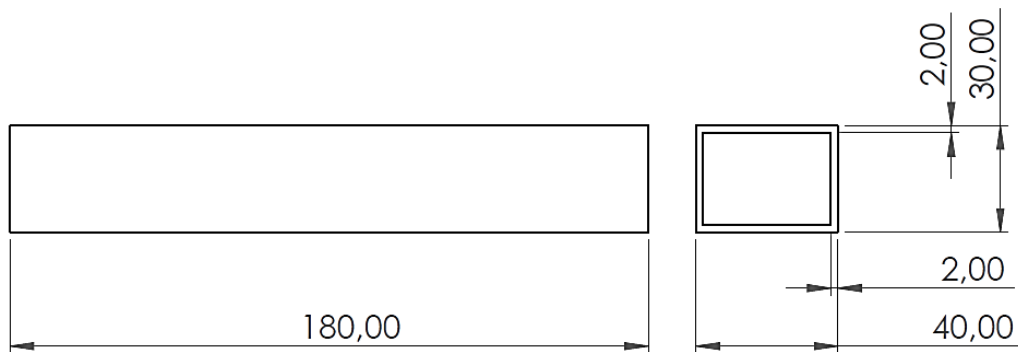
Beam dimensions drawing [SolidWorks Drawing]
